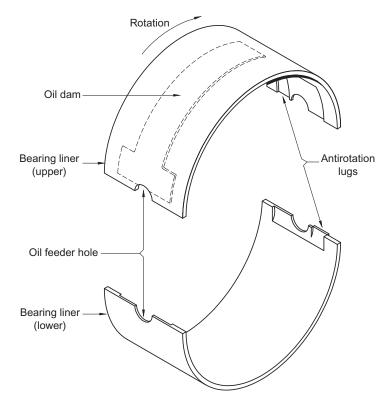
Pressure-dam sleeve bearing liner. Courtesy of the Elliott Company.
